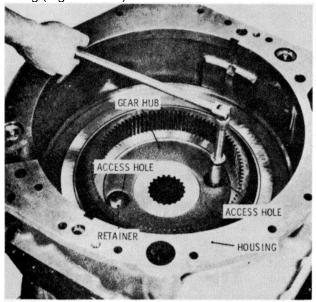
Removing Splitter Ring Gear Hub Bearing Retainer Bolts
